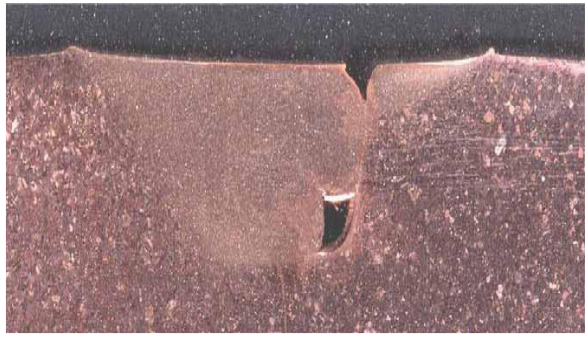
Similarity in the formation of surface-breaking and sub-surface voids in a Copper FSW weld.
